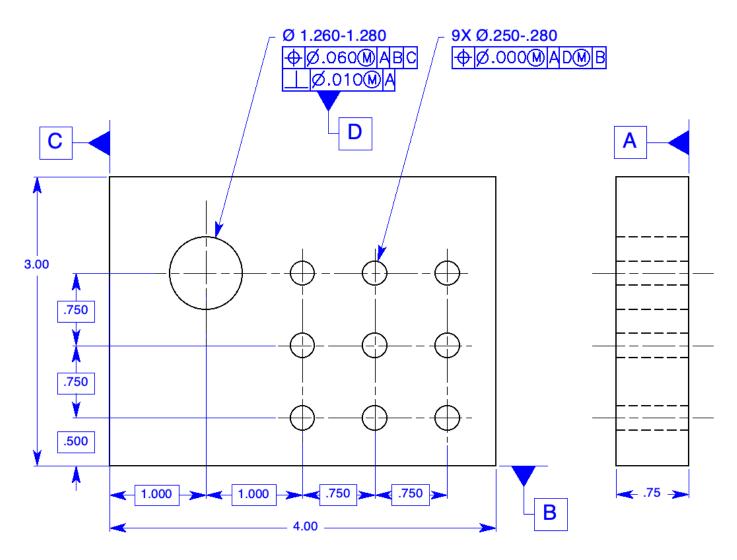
A pattern of holes located to a datum feature of size: Prob. 9.
